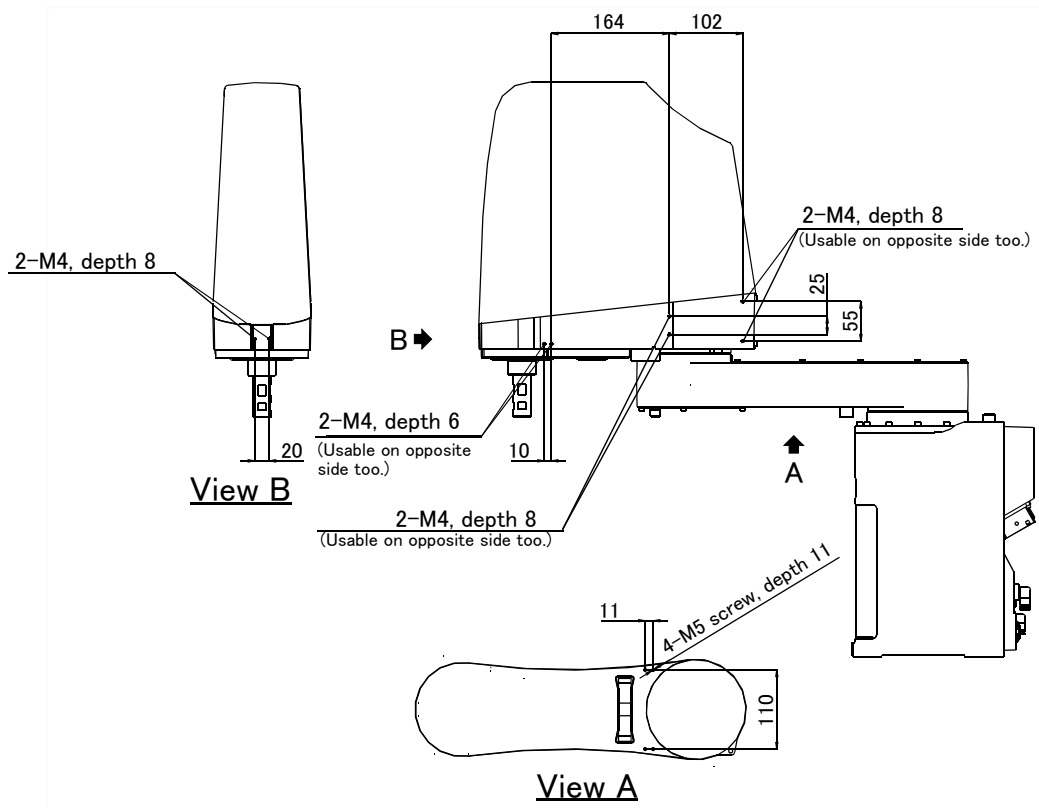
Location of screw holes for fixing wiring/piping (RH-6FH)
